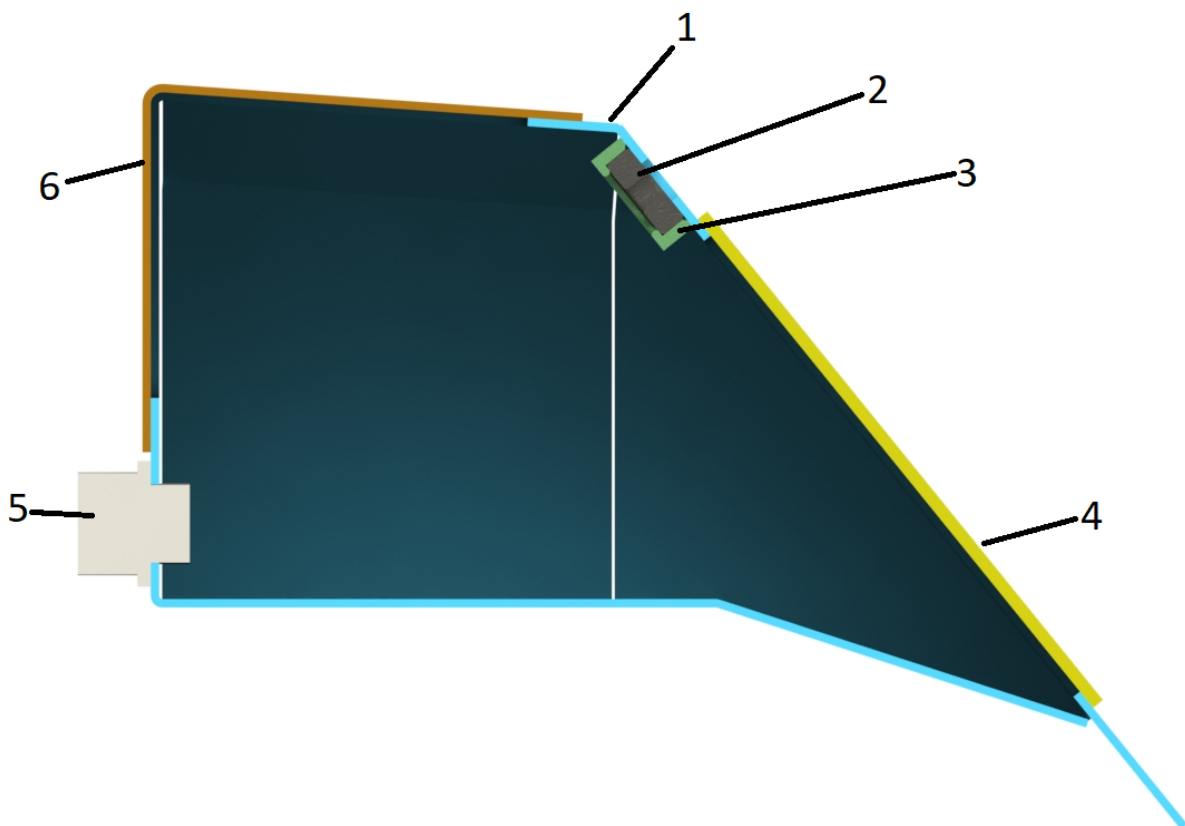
The front module enclosure components: main frame (1), shaft seal (2), shaft seal adapter (3), front window (4), bayonet connector (5), back lid (6)
